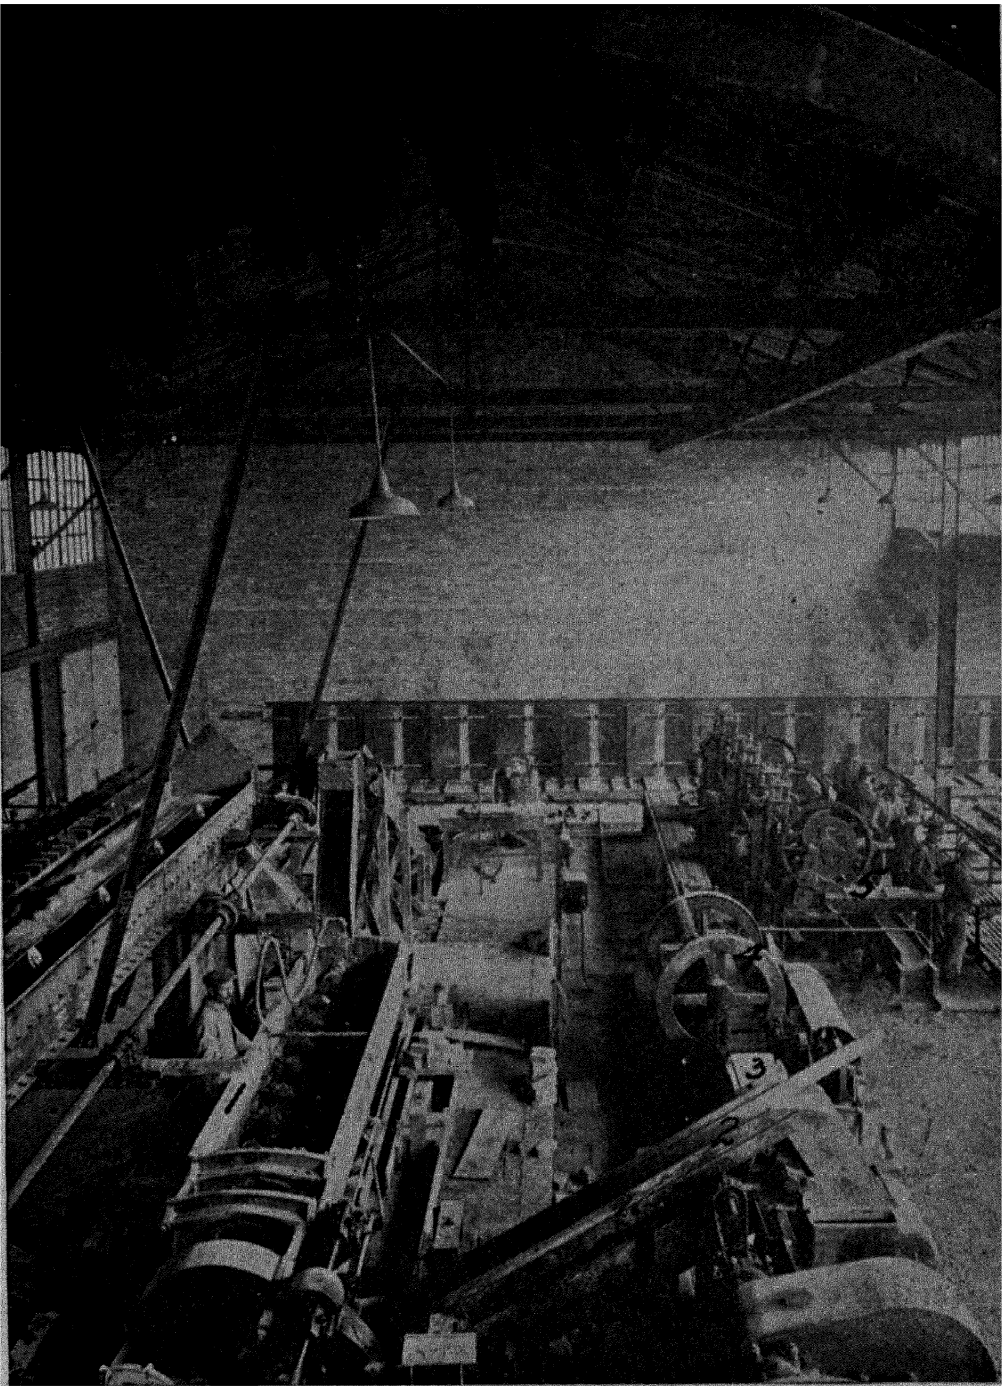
III.—Interior of a brick plant. (1) Pug mill. (2) Conveyer. (3) Brick machine. (4) Wire cutter. (5) Repress.
